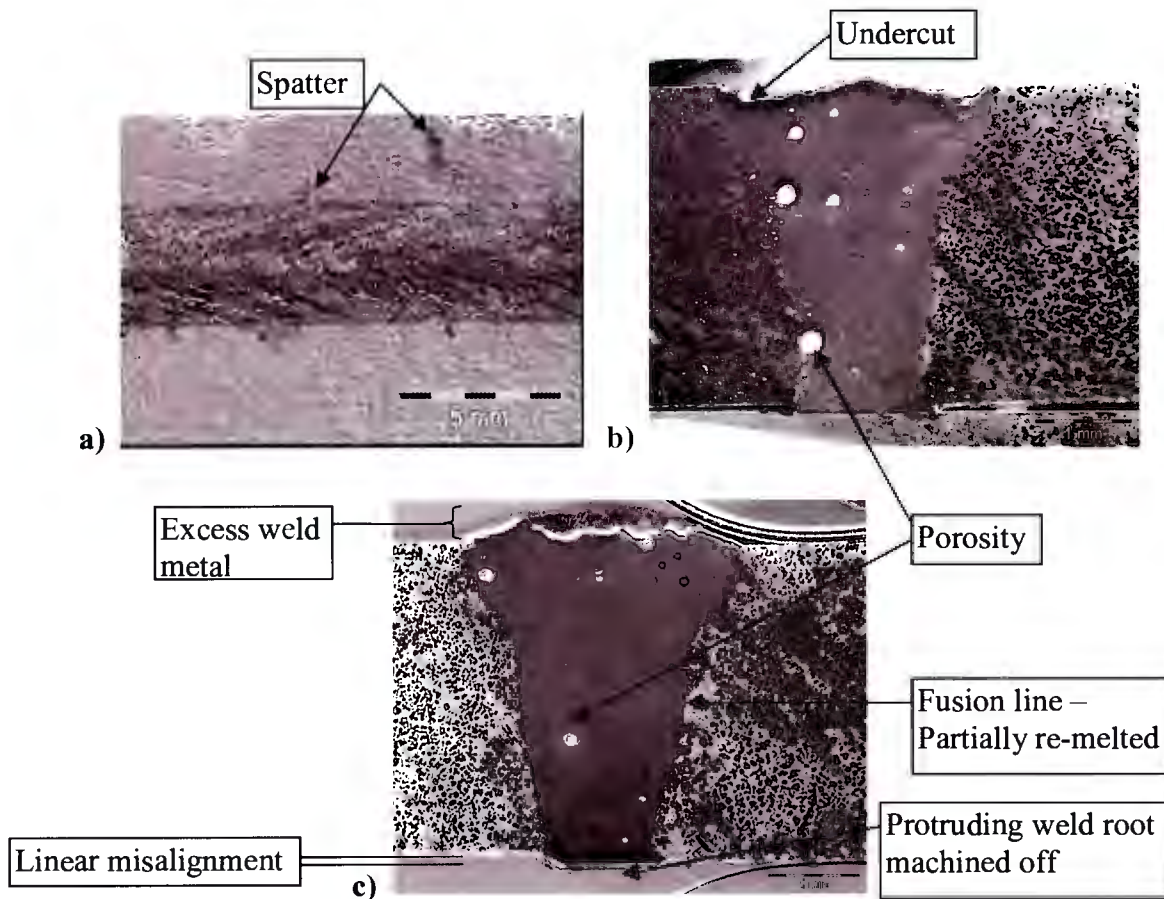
Stereo micrographs of typical F357 laser butt weld faces (a) and bead geometry / porosity level of first-batch welds (b) and second-batch welds (c).
